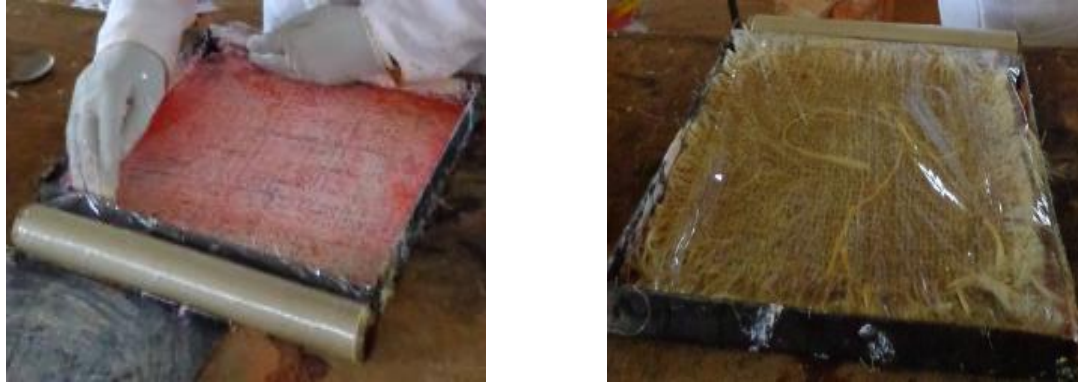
Wrapping of Aluminum foil to the bottom and top of the mould
